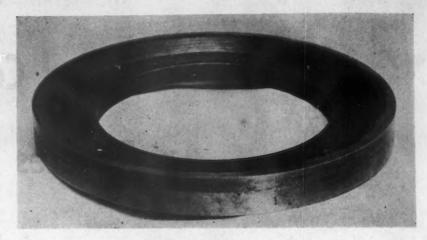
Finish welded die after rough grinding, showing deposit at the outer
